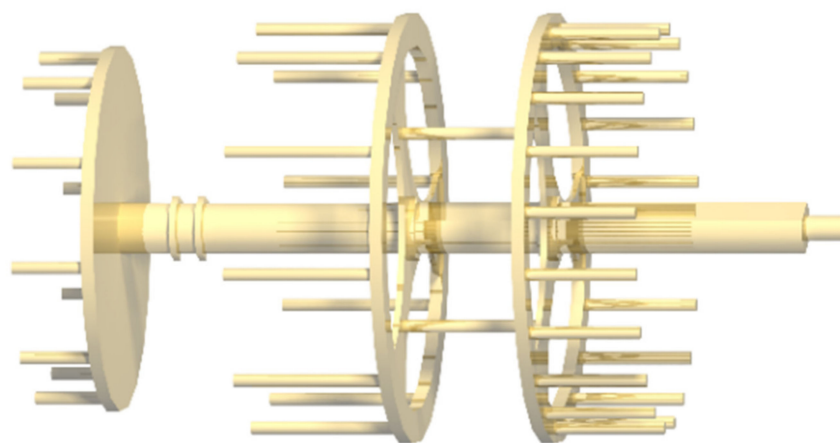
comprises a toothed wheel and a lantern gear, the latter composed of a series of cylindrical bars that have been engaged by means of the corresponding constraints on a circular base. This sub-assembly is the user interface, that is, the element with which the user interacts with the machine by turning the upper numbered crown to input the addends.
